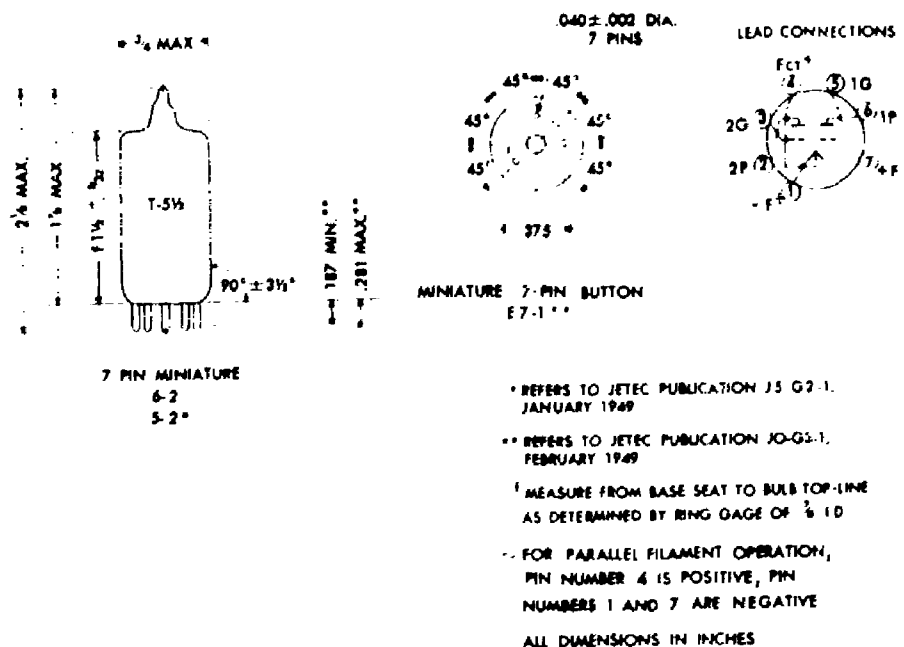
Outline Drawing and Base Diagram of Tube Type JAN-3A5
